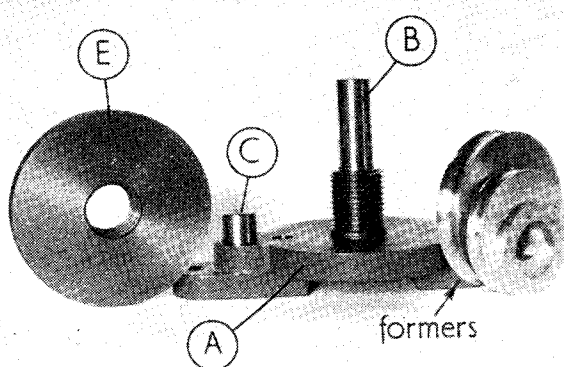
Base of the machine, showing mandrel, top plate and bending formers
